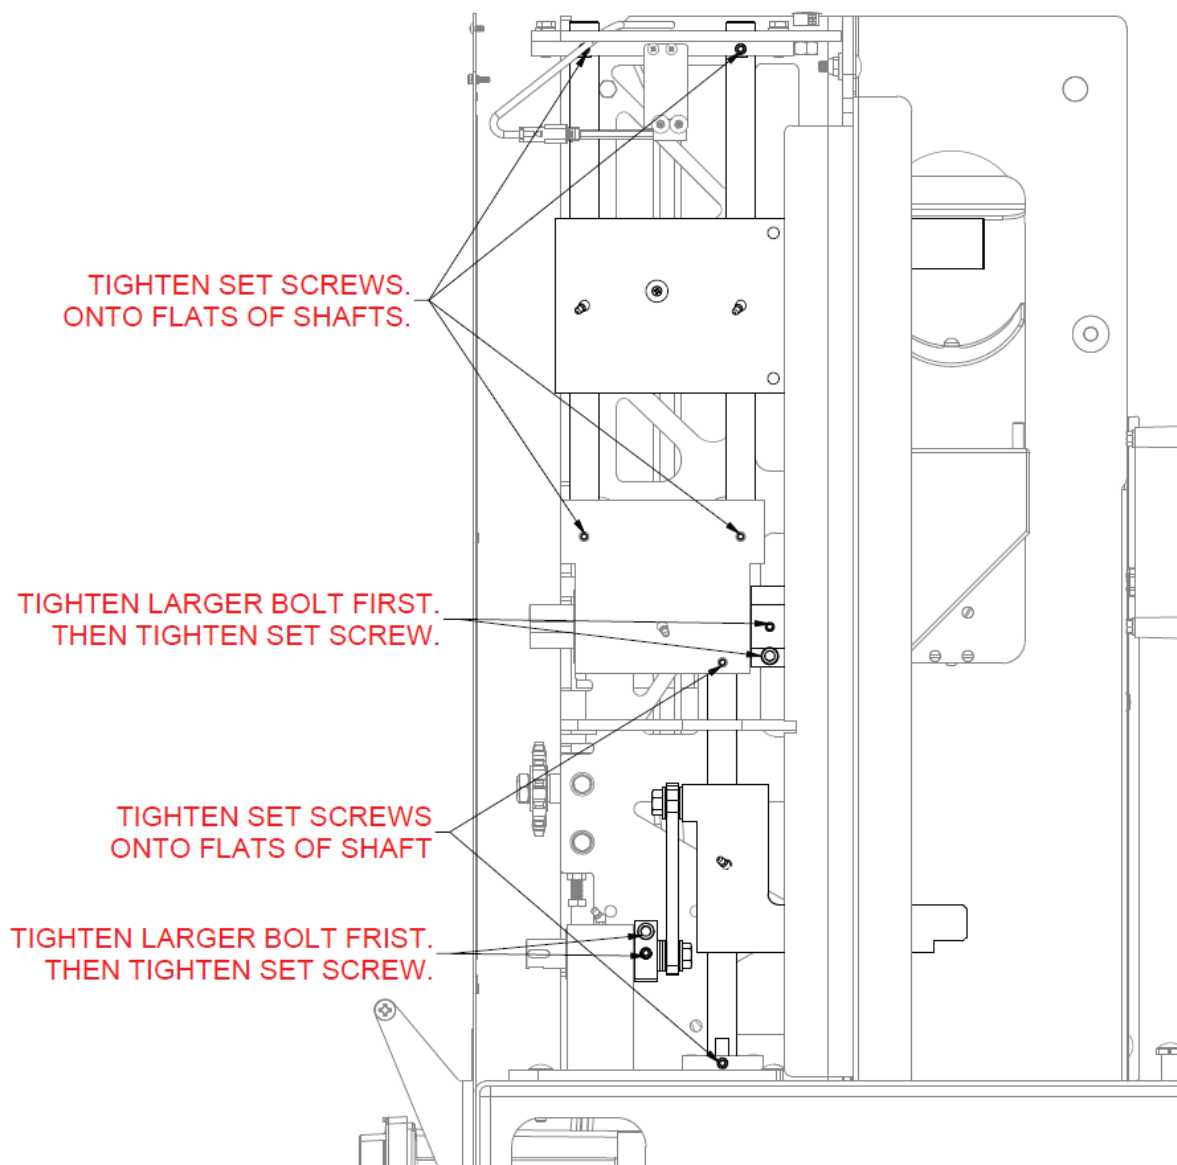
Install Upper and Lower Drive assemblies and Guide Shafts.
